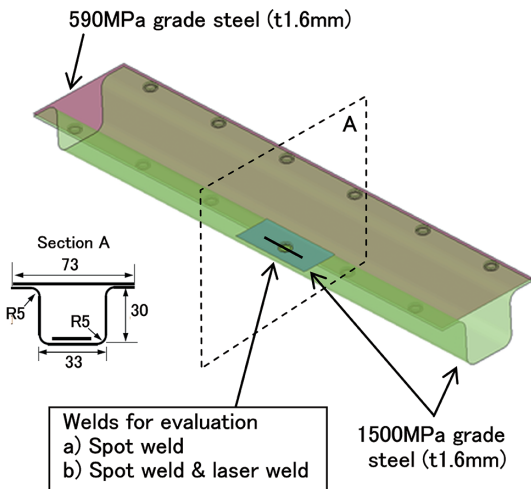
Schematic of hat-shaped component welded with a small rectangular sheet
